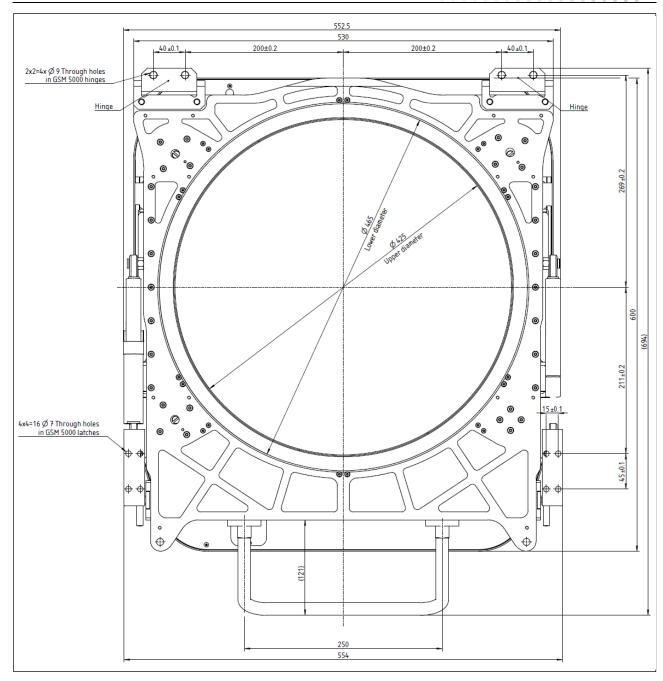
Dimensions of fastening holes and footprint with optional installation parts
